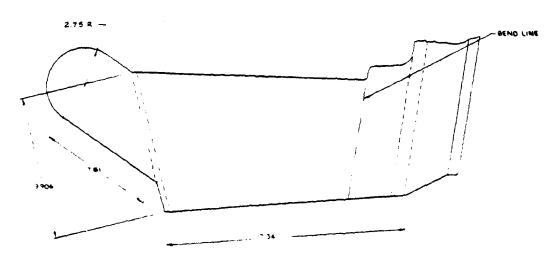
Dimensionalized Drawing of MPES Seat Structure (Seat Bucket)
